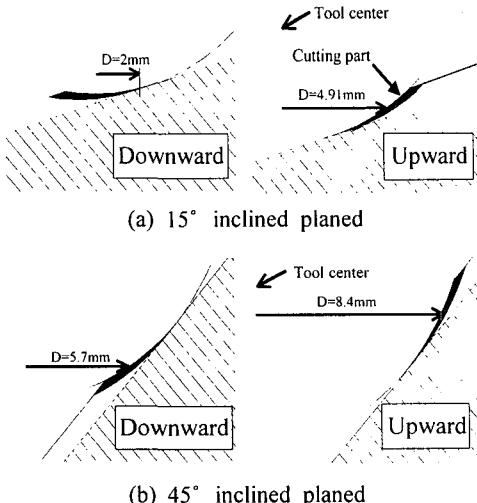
Comparison of cutting part in ball-end mill tool according to tool path ($d=0.4\text{mm}$)
